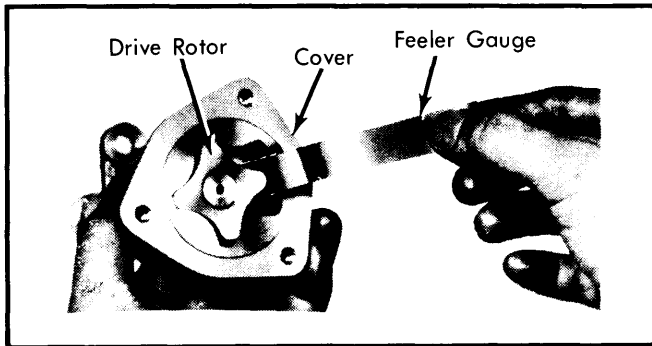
Checking Oil Pump Rotor Tip Clearance
